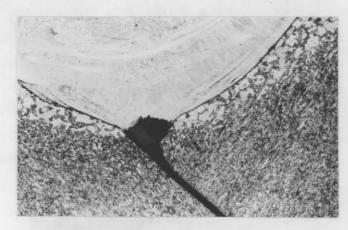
Through-thickness crack tip in an FLNFT test specimen welded with a 308L filler metal with a heat input of 1.2 kJ/mm. Note the incomplete joint penetration of the fillet weld (35X).
